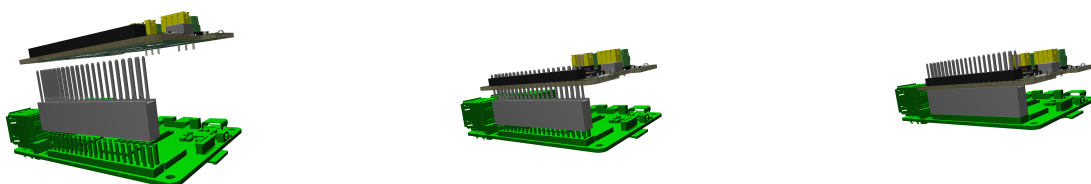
Assembly of the 2x20-pin stackable header between Raspberry Pi and HAT
